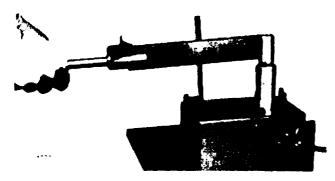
C-39. Tightening Injector Nut with Torque Wrench
